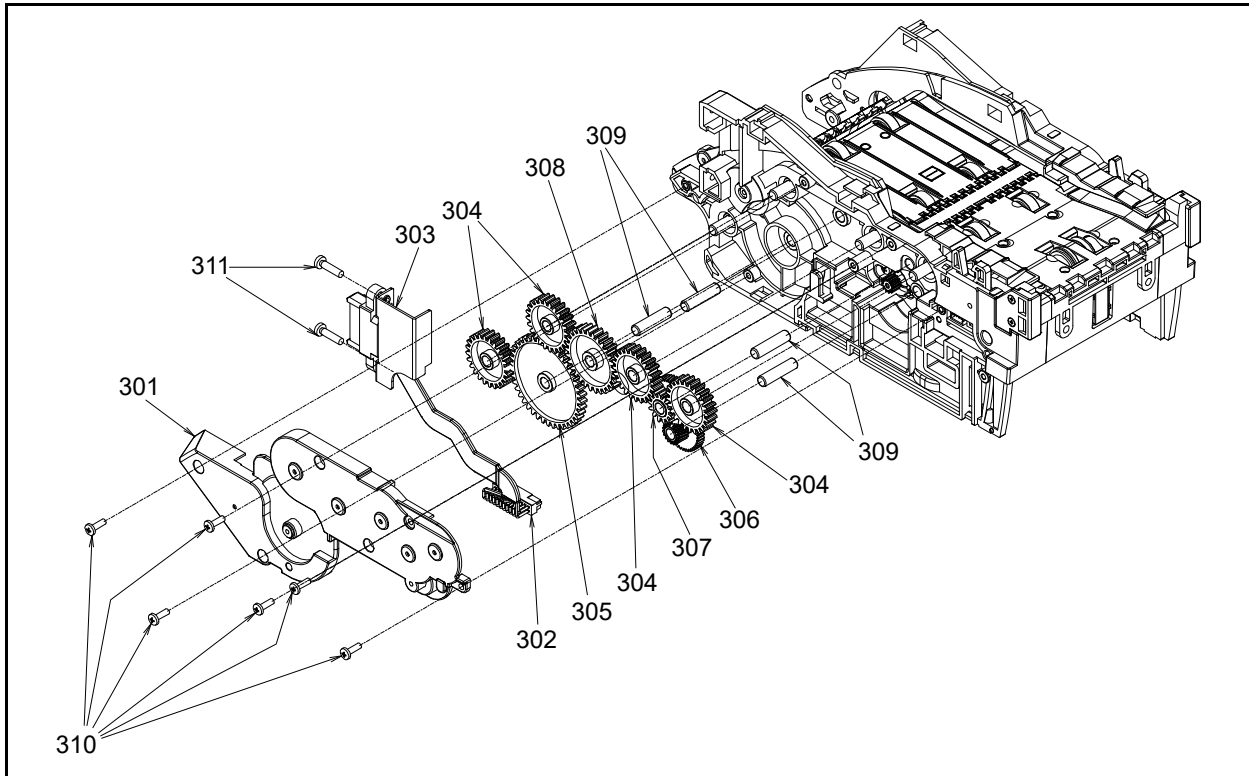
UBA Pro Transport Unit Exploded View 2
